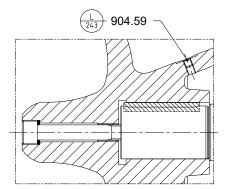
Grub screw 904.59¹³⁾ in the impeller
